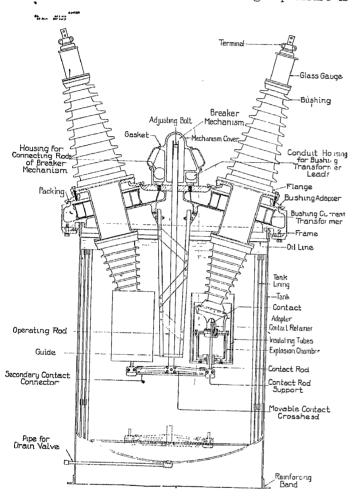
Typical Outline of Single-Pole Element Oil Circuit Breaker, 110,000 Volts and Above
